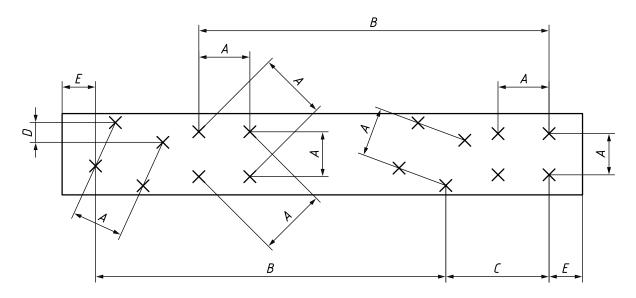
Measurement of tolerances on fastening components positioning of bearer
